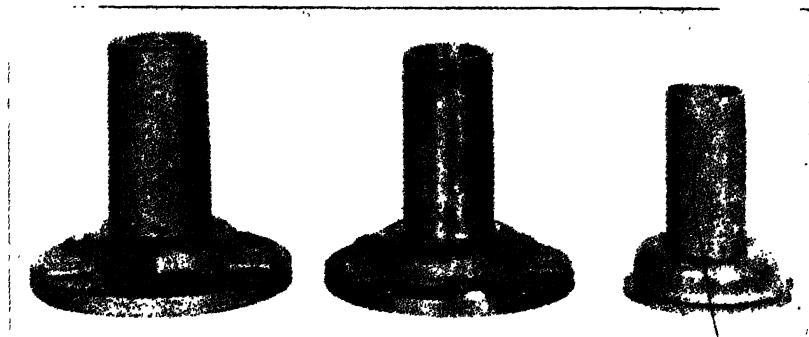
Three designs of an automobile clutch-gear bearing retainer. Malleable iron casting weighing 2.5 lb (left); malleable iron casting machined weighing 1.5 lb (center); and new copper-brazed construction from steel tubing and a stamping weighing 0.5 lb (right).
